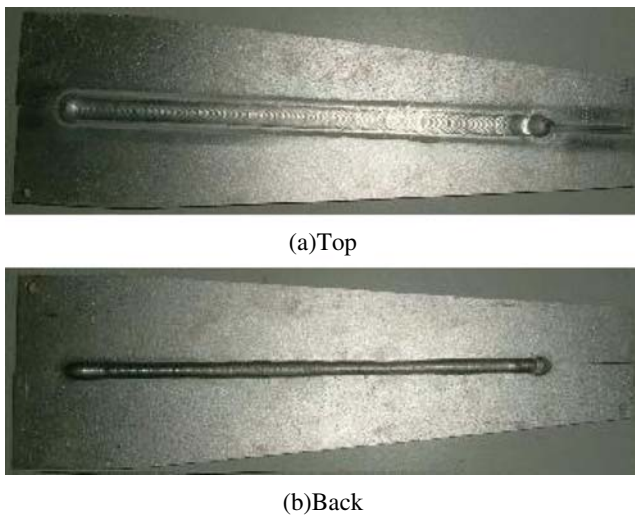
a–b Welded workpiece controlled by wire feed rate PID
